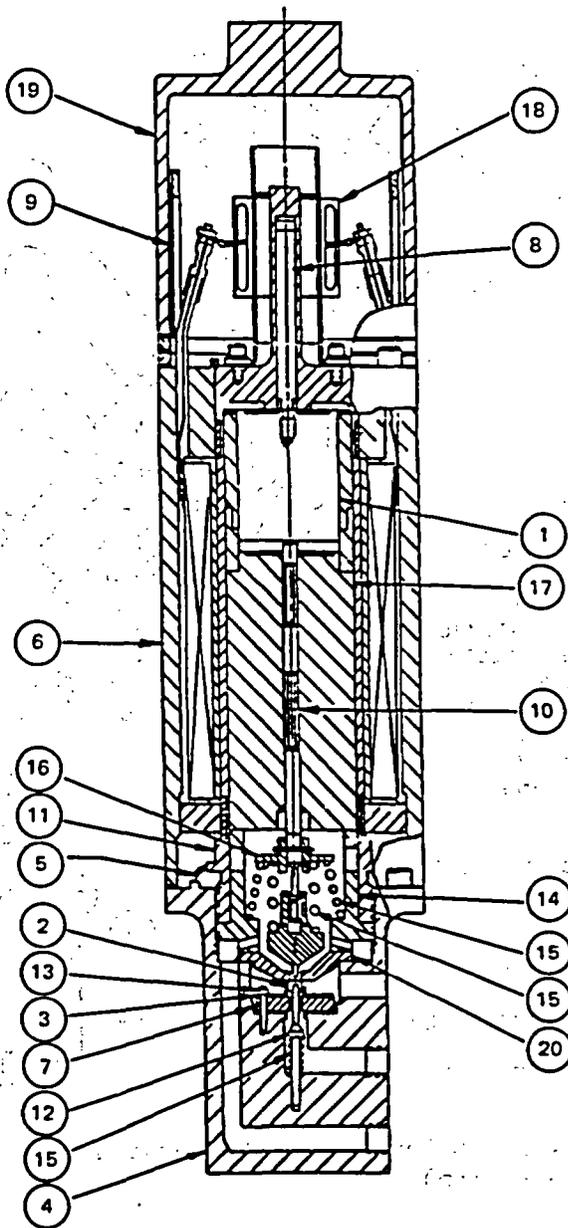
Solenoid valve assembly for Crosby PORV — part No. 13 on Fig. 3 (Courtesy of Crosby Valve and Gage Company)
